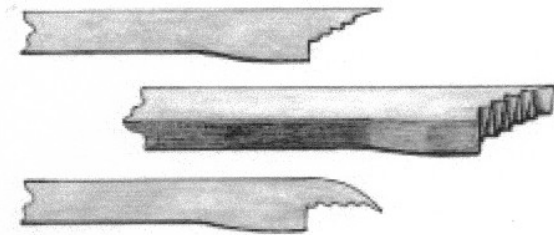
Top- shouldered and stepped scarf. Bottom- Curved tip. Shoulder prevents scarf from overlapping beyond upset area when scarfs are quickly placed together.
